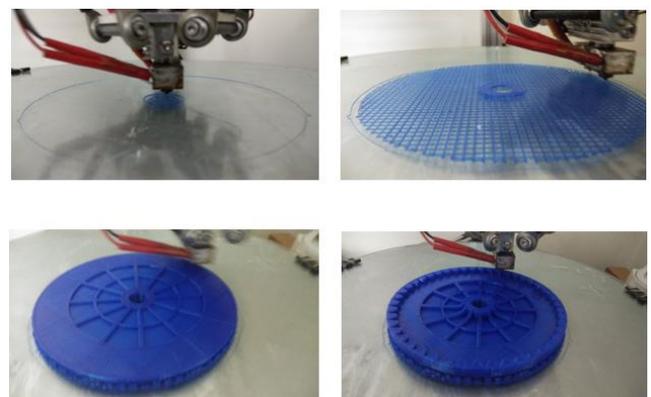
3D Printing of Transmission Gear in 3D Printer
